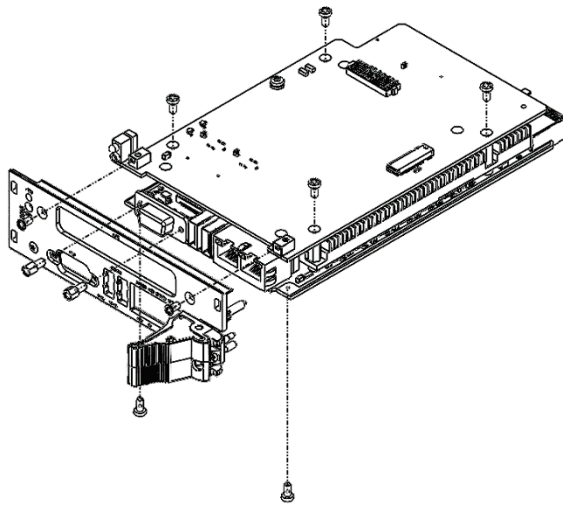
Screws Securing the XMC Module to the MMEXT-XMC02 Extension Module
